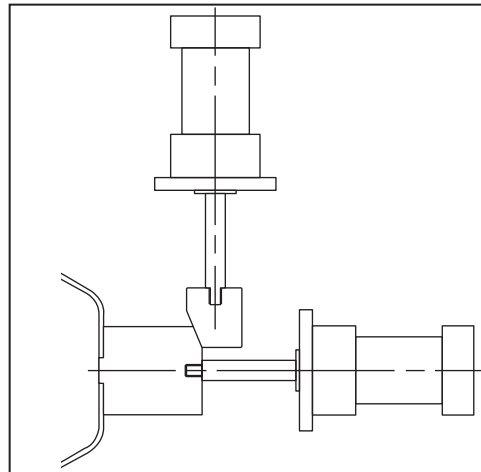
Slide Movement example using a hydraulic cylinder to actuate slide, and a separate cylinder to actuate the heel block.
